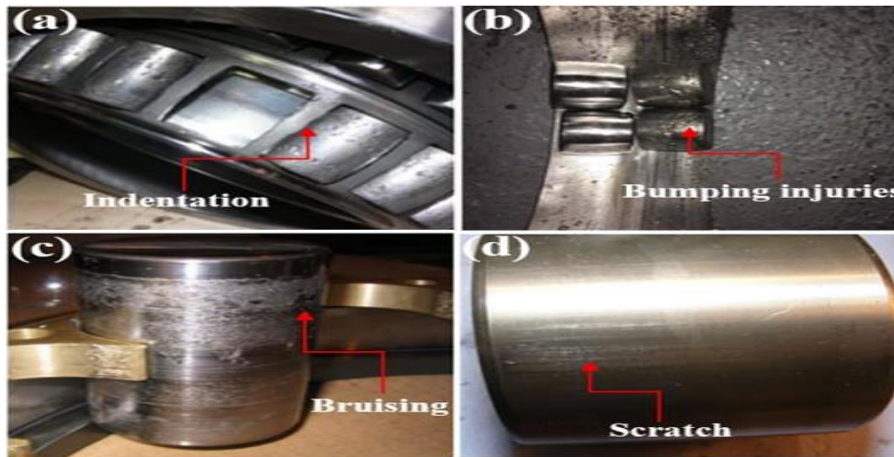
Bearing plastic deformation failures, (a) Bearing rolling parts' indentation, (b) Bearing inner race bump injury, (c) Bearing rolling body bruises, (d) Bearing rolling body scratches[111].
